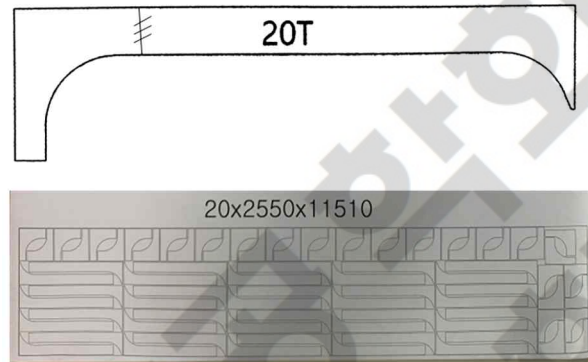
Arrangement of 40 pieces with one seam in Case 1
